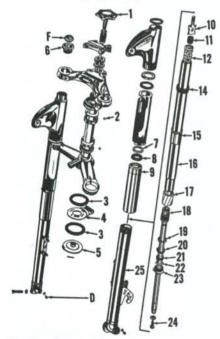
Exploded view of front fork typical of all 175 and 250cc models.
